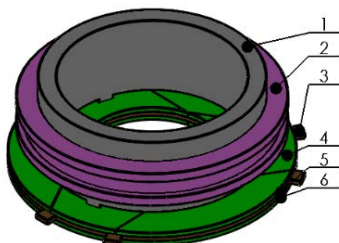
Design of the actuator: 1 – carbon fiber tube; 2 – slider; 3 – clamping point; 4 – electrode; 5 – piezo ceramic disc; 6 – bronze disc
